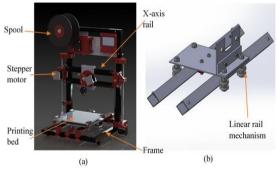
(a) KLAKS 3D Printer and (b) its X-axis Linear Rail Mechanism
